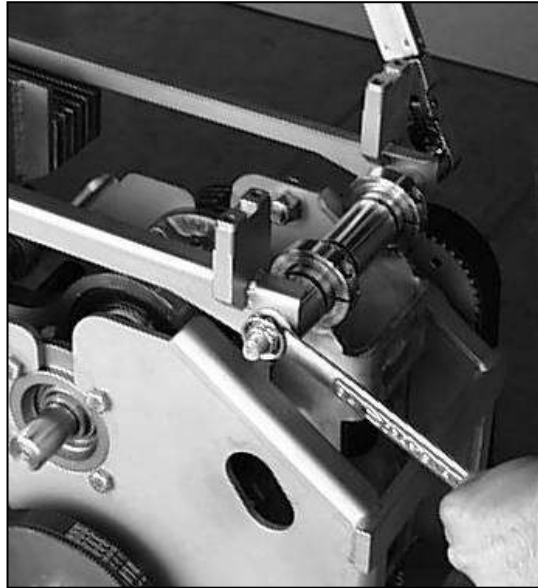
Tightening the Pan Attachment Arm Bolts
